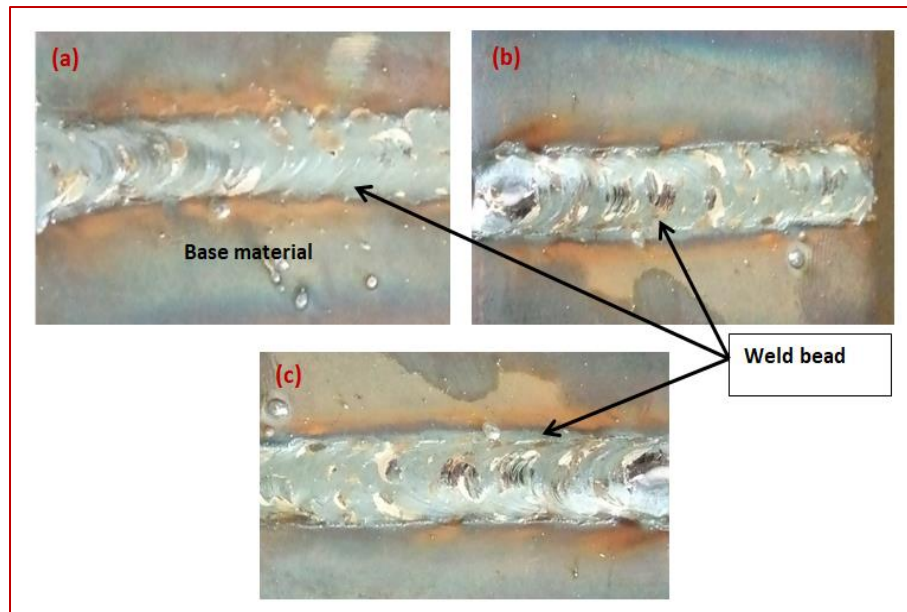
6 . Welding bead for different angles, put welding parameters for each (a) 15 oC (, (b) 30 °C and (c) 45- oC
